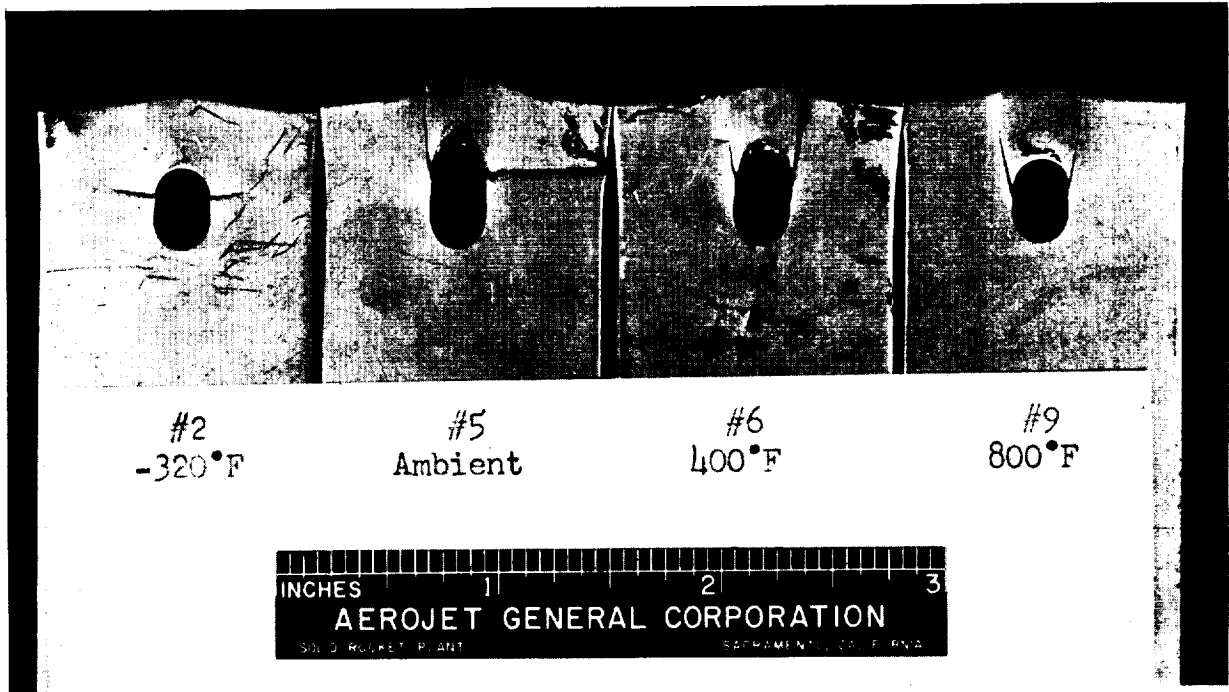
Bearing-Load Test Specimens from 0.052-Inch Thick Hastelloy X Sheet (Heat 261-5-4000) After Testing
